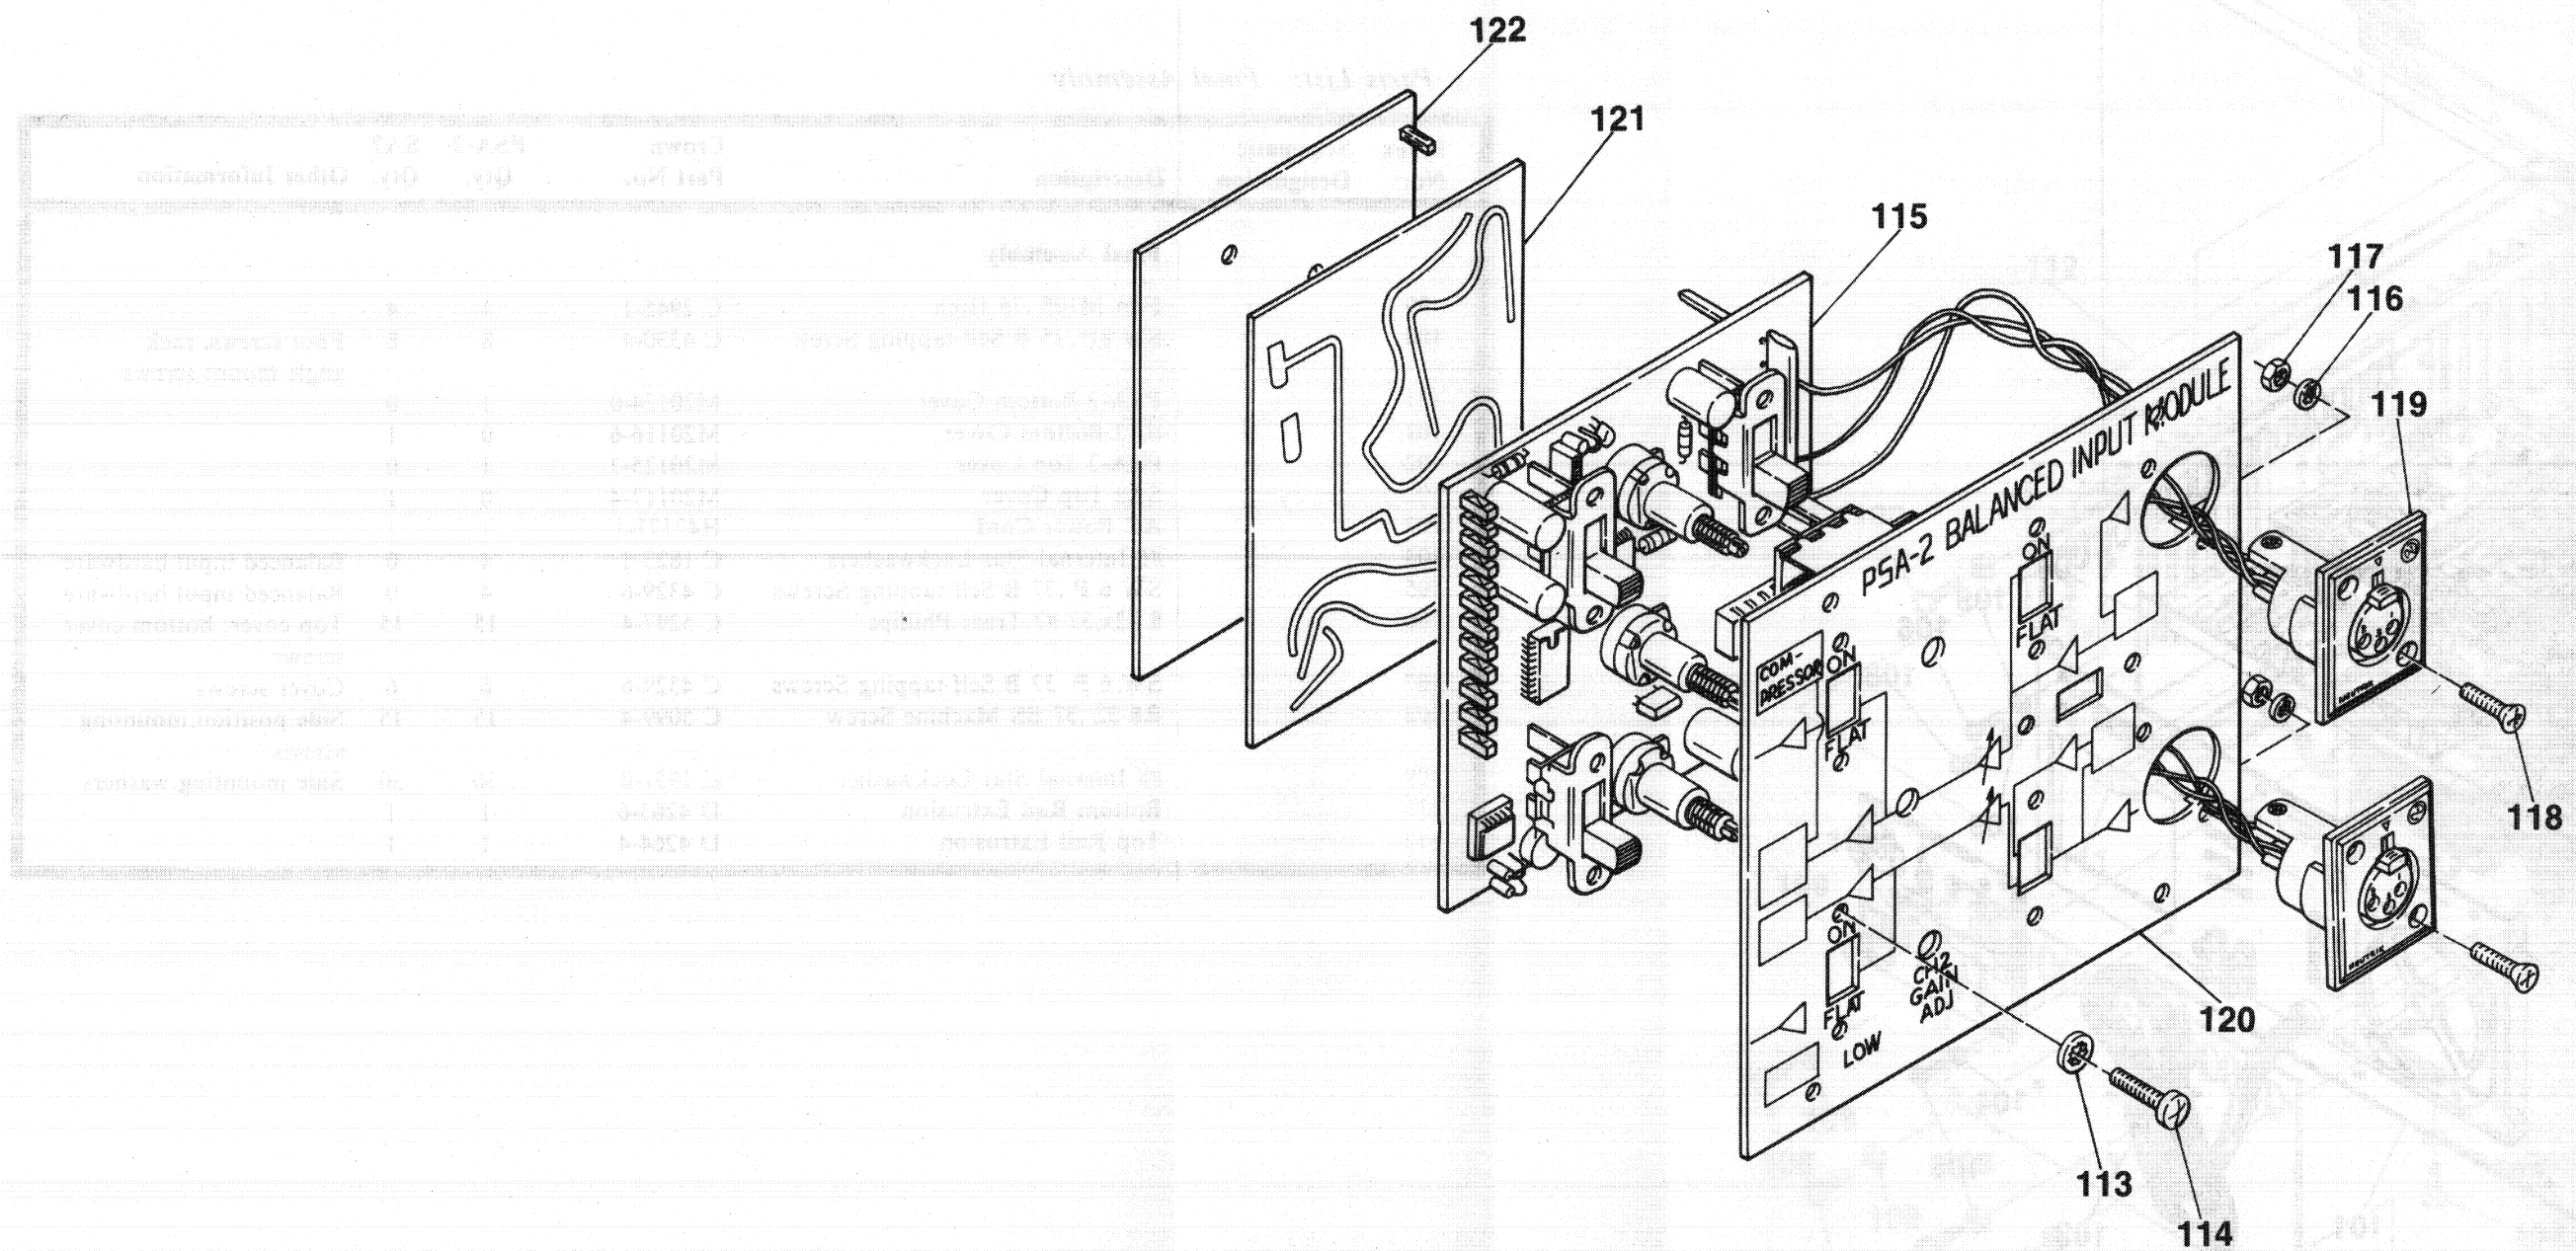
PSA-2 Balanced Input Module Assembly
